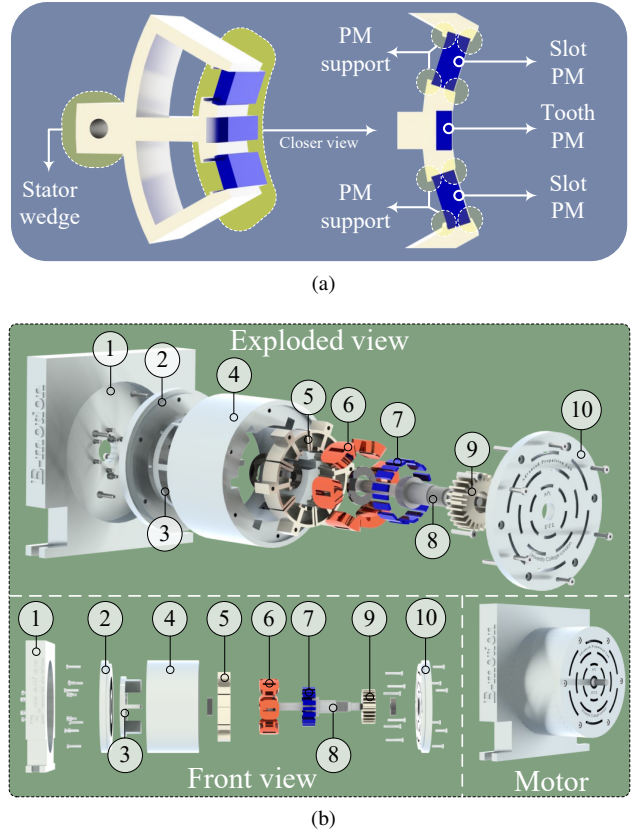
Prototyping procedure. (a) One stator module. (b) Exploded view of the proposed motor: 1) Stand, 2) end cap, 3) leveler, 4) house, 5) stator, 6) coils, 7) PMs, 8) shaft, 9) rotor, 10) end cap.
